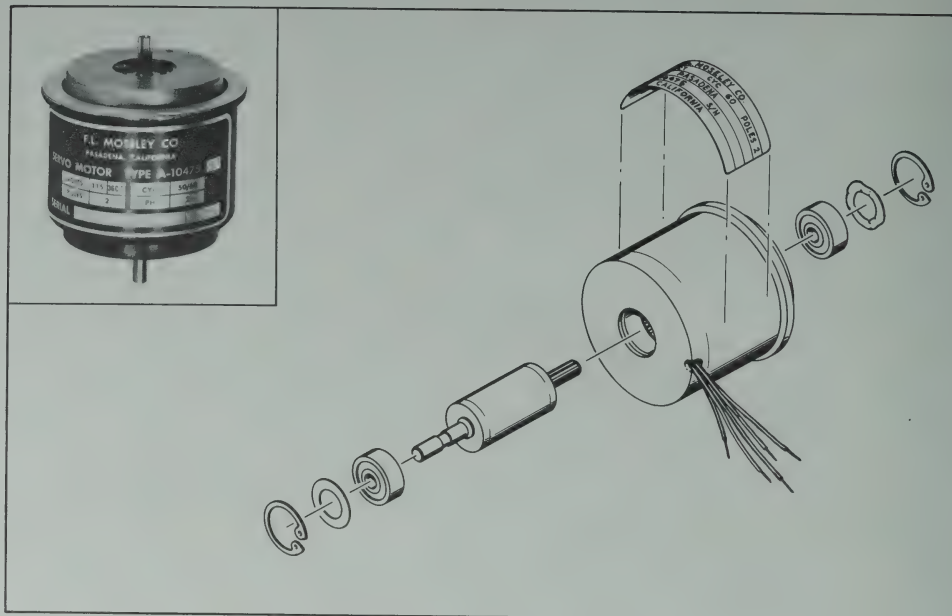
SERVO MOTOR ILLUSTRATION
